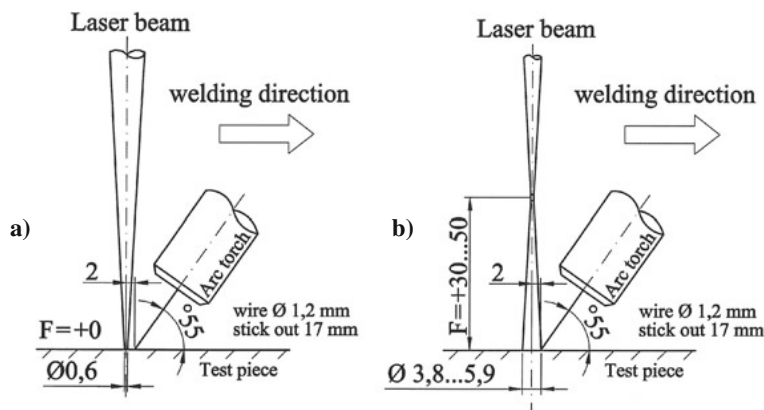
Set-up used in hybrid welding: (a) key-hole mode in welding of root pass and (b) conduction limited mode in welding of filling passes
